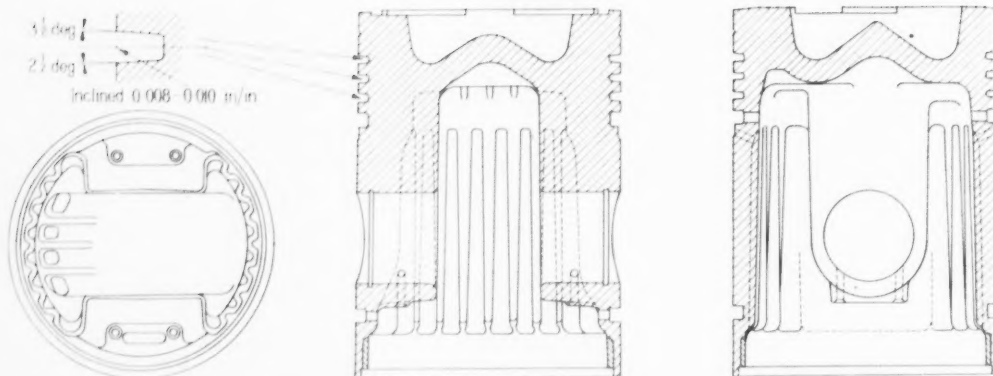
This 4.8 in diameter piston for the Leyland six cylinder oil engine has an open variable concave combustion bowl and taper sided and up-tilted compression rings
